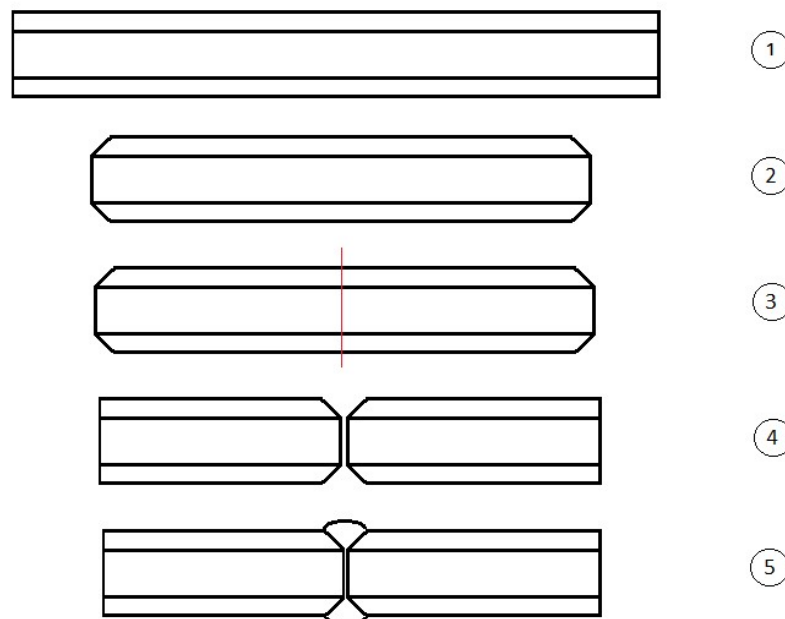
Steps for samples manufacturing for full scale fatigue testing. Step 1 – Lined pipe “as fabricated”; Step 2 – Cut-out of clad welds in order to turn their lengths adjusted to 50mm +0 – 10mm (see 7.3.2.1.1) and subsequent beveling for girth weld; Step 3 and 4 – Cut pipe in two halves and turn lengths; Step 5 – Girth welding of both halves.
